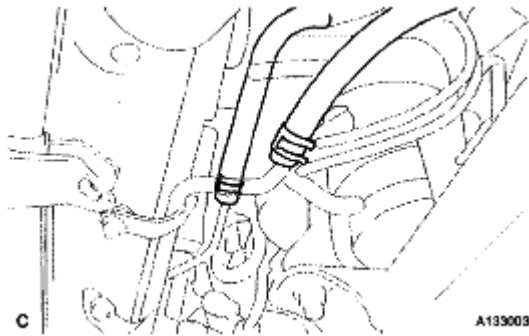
Identifying Oil Cooler Outlet Hose Clamp
